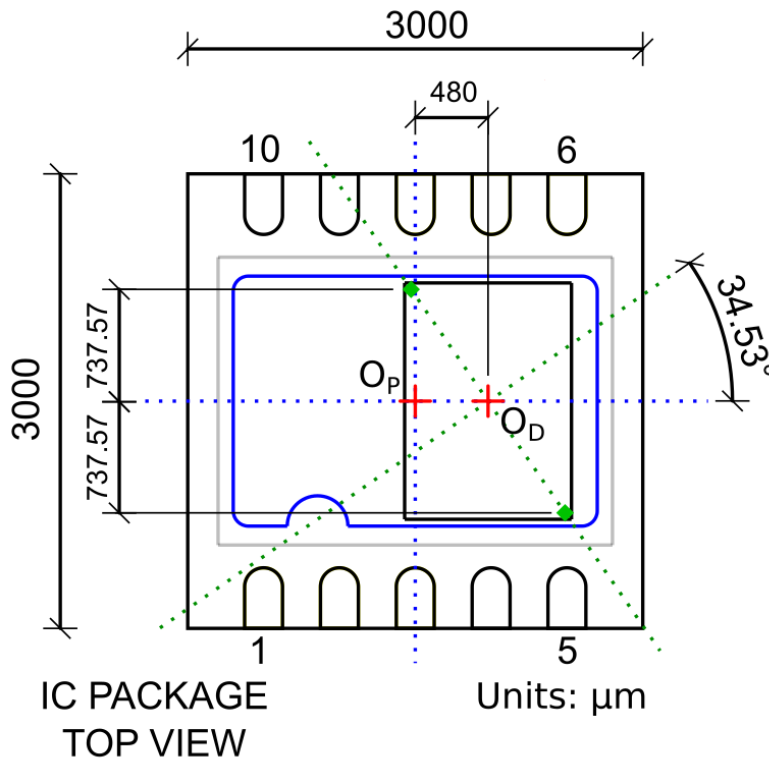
Technical Drawing showing DIE placement within the package. The Hall-Plates are shown as the two green pads in the corners of the DIE. Package axis and hall-plate axis are also shown.
